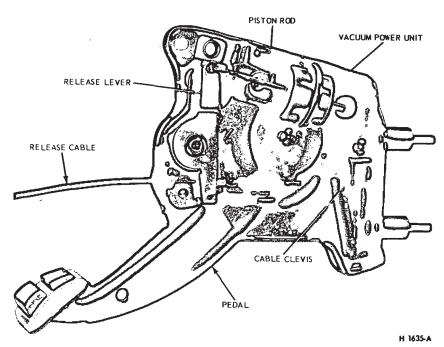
Parking Brake Control Assembly with Automatic Release—Typical
